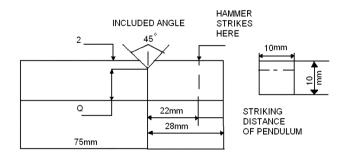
Specimens Geometry for Izod Test as per ASTM standard
